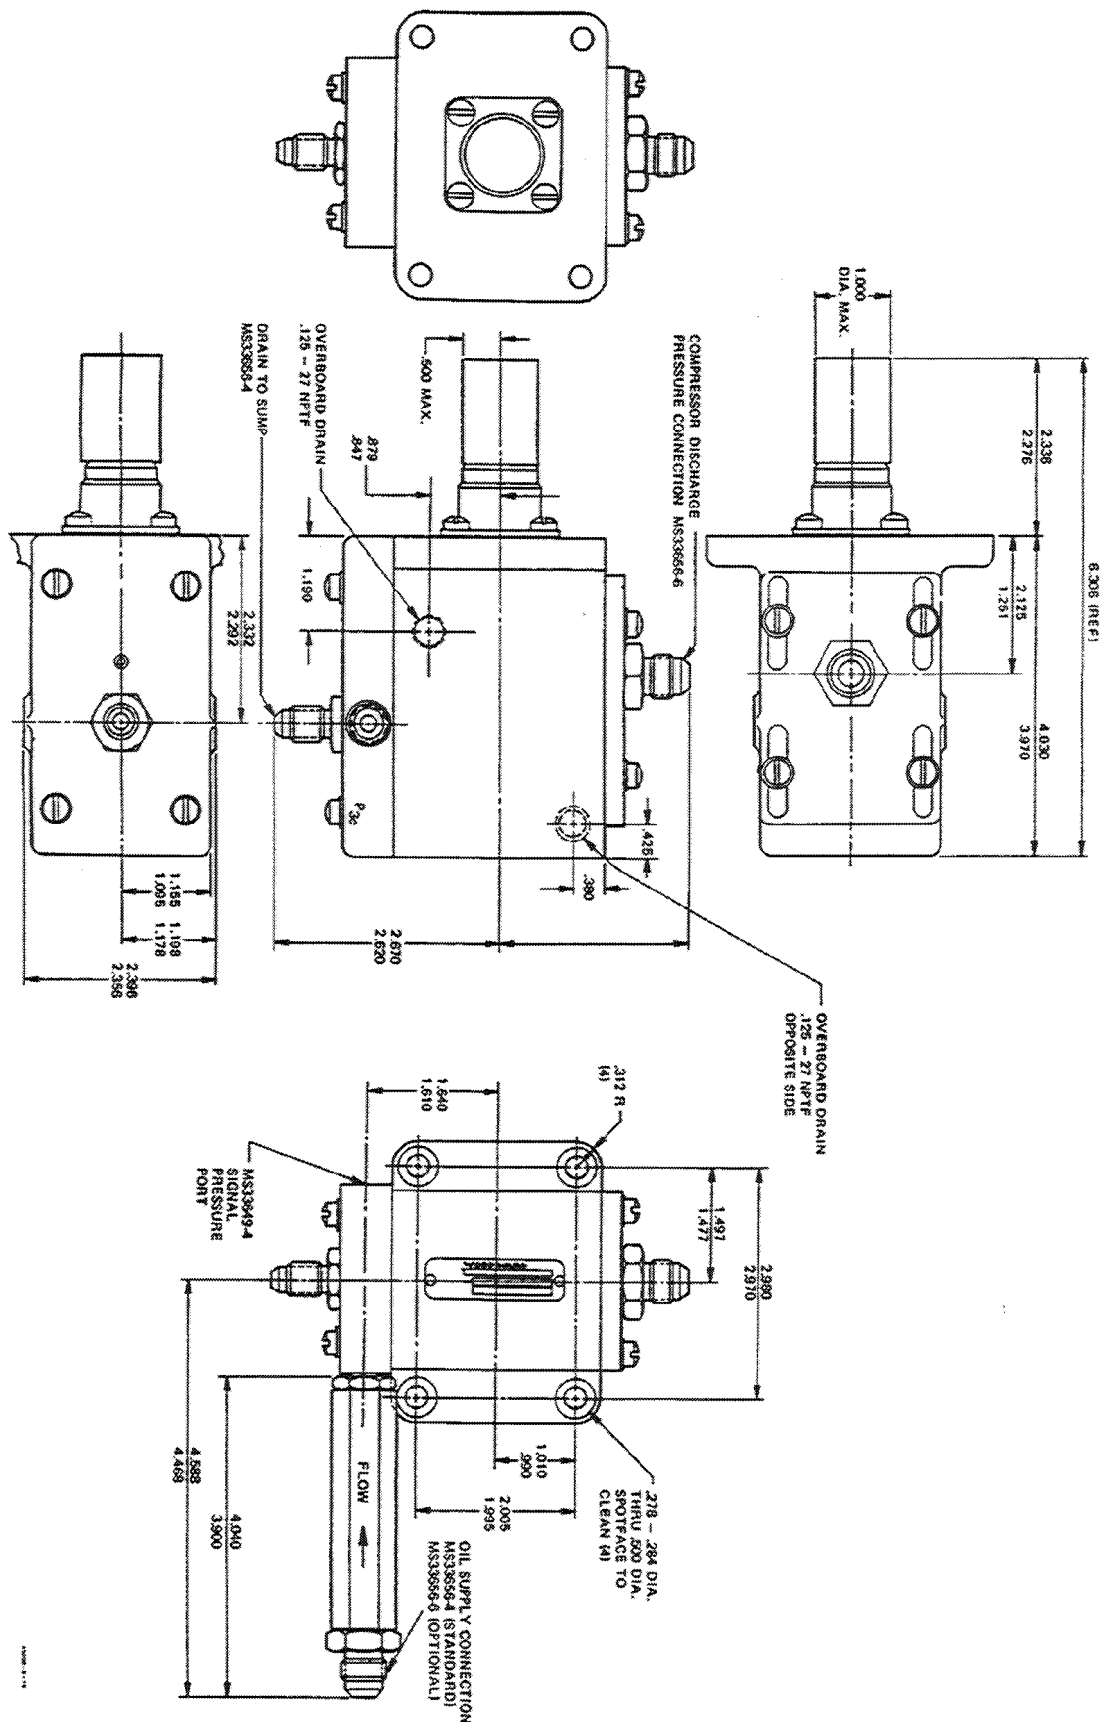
Outline Drawing of CDP Sensor Assembly
